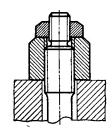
Lock nut screwed on special bolt end (the bolt has a right-hand screw thread, and its end, a left-hand screw thread)
